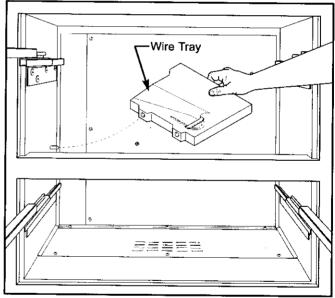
Wire Tray Removal (700BFI-3 Shown)
